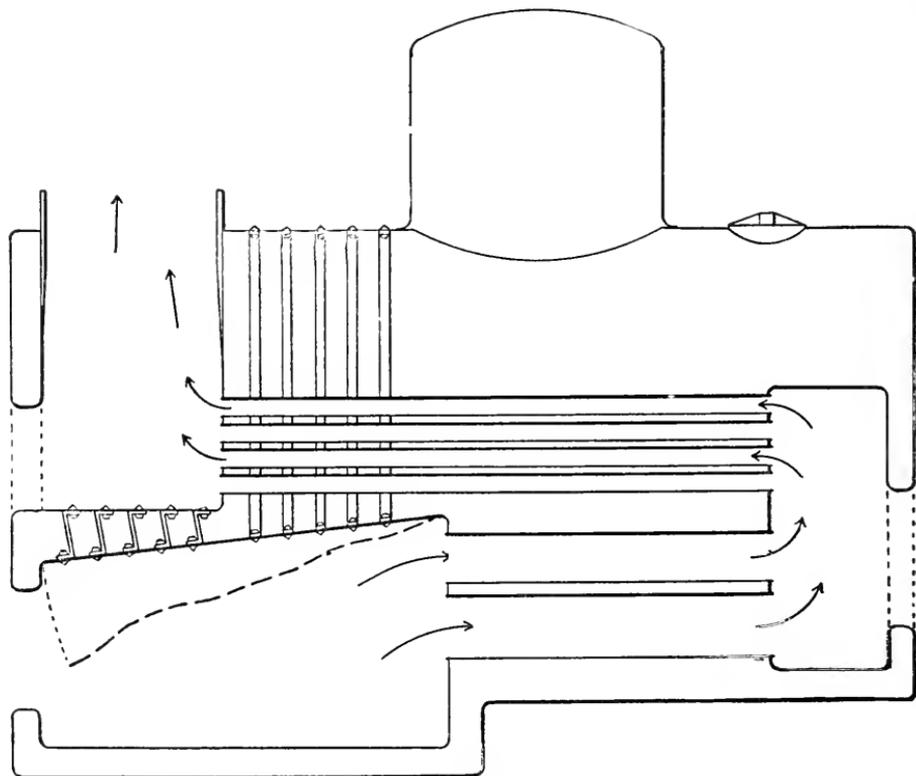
SECTIONAL VIEW OF THE "RAMBLER'S" BOILER.
